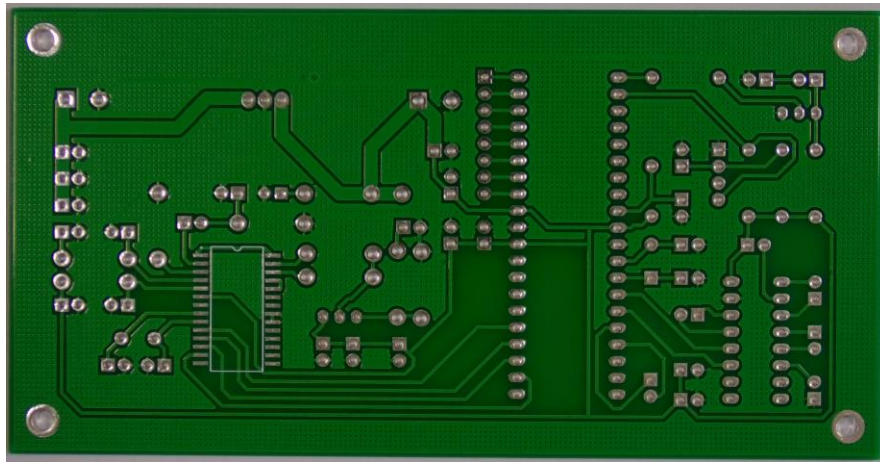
Kaggle PCB sample 01 defect-free image
